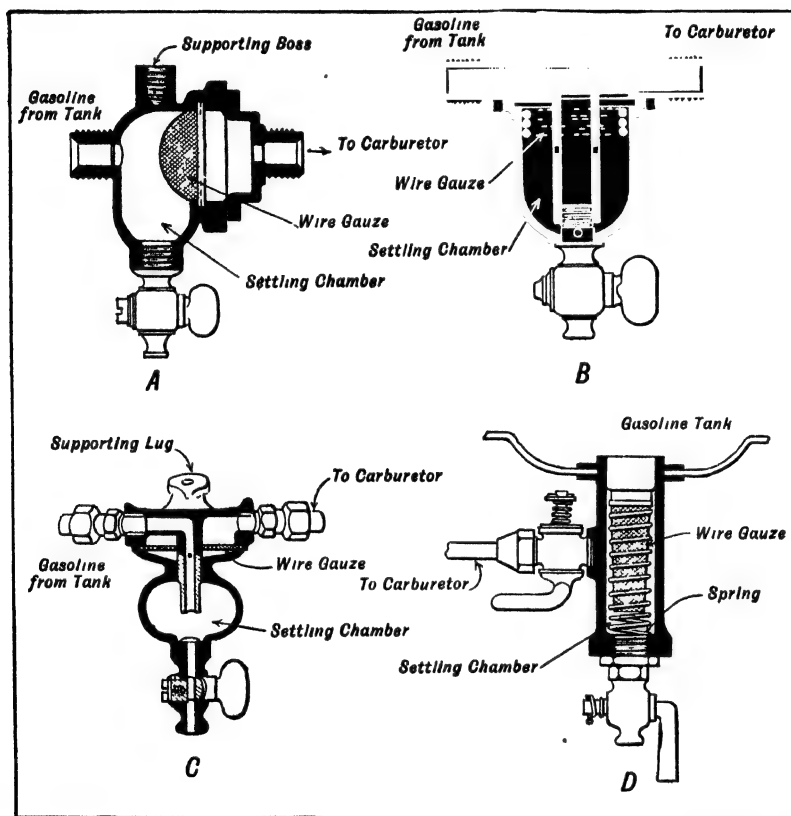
Types of Strainers Interposed Between Vaporizer and Gasoline Tank to Prevent Water or Dirt Passing into Carburetor.
